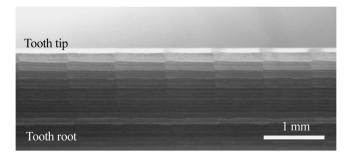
Tool marks on tooth surface of work gear from hobbing.
